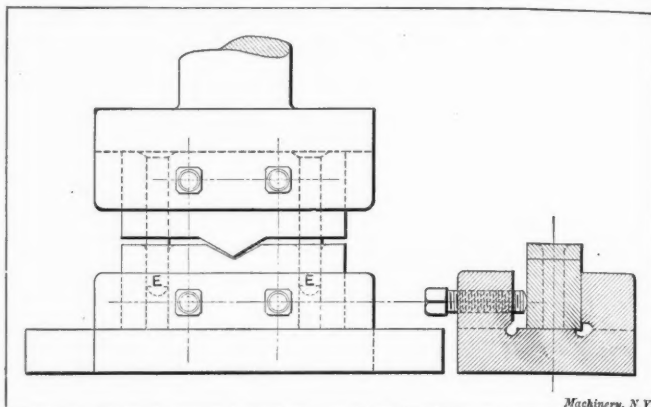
Simple Form of Die Holder adapted to Bending Die
